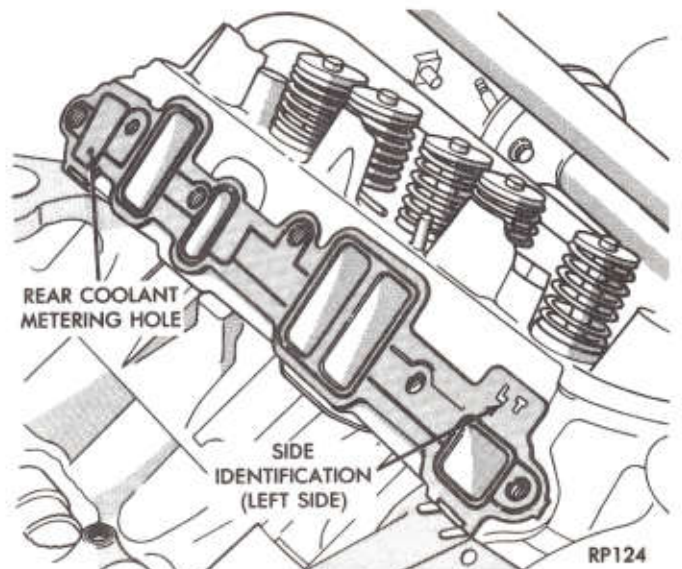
3.9L Intake Manifold Side Gaskets — Left Side Shown
